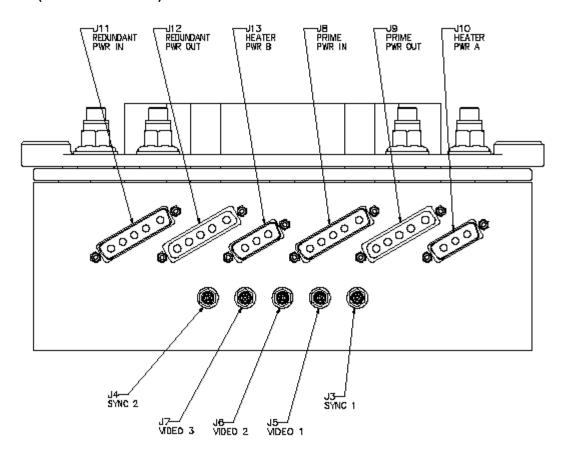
EBCS AVIONICS PACKAGE MOUNTING INTERFACE DIMENSIONS
